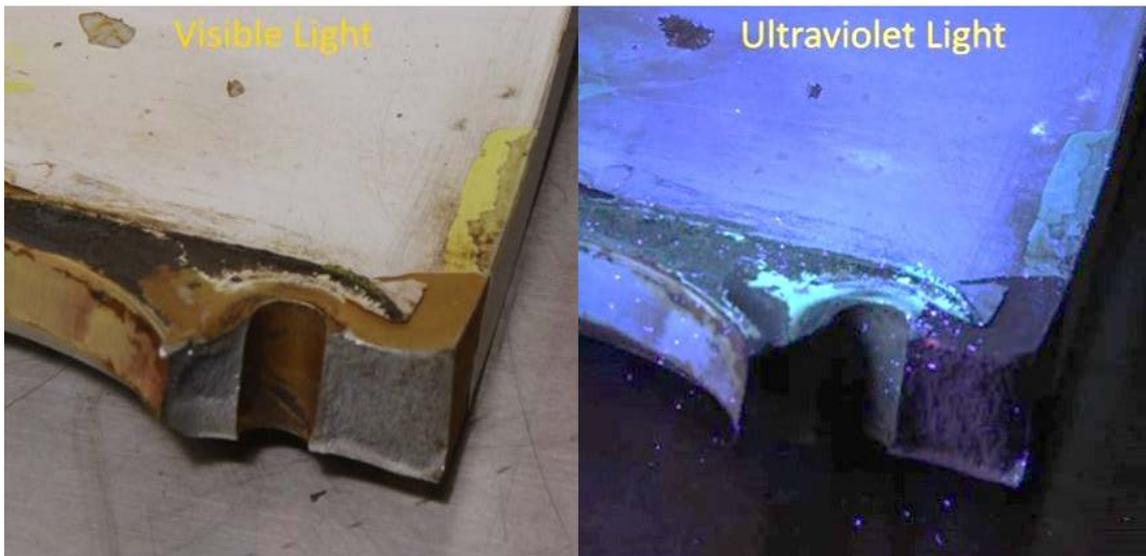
Bolt hole fracture surface under visible light and ultraviolet light showing evidence of fluorescent penetrant (Source ATSB)
